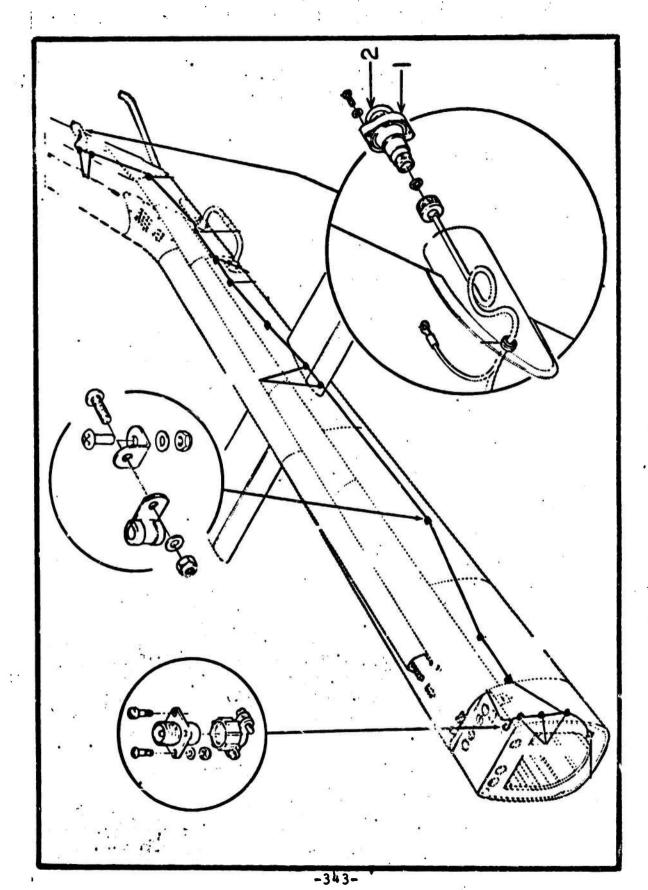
Electrical Installation, Upper Tailpipe Fairing
